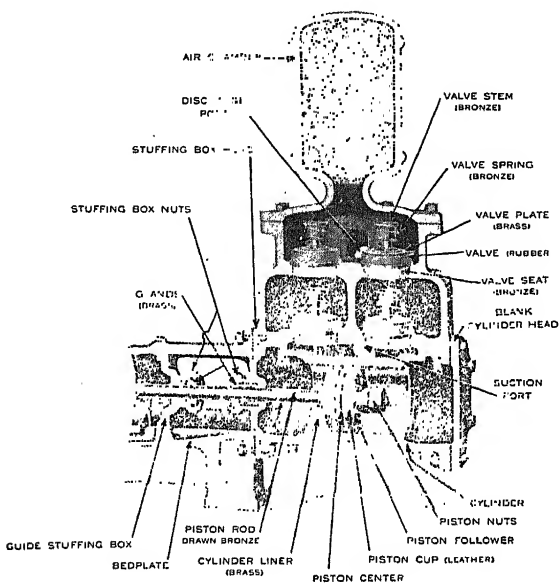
Section through water end of a pump showing valves, piston, packing glands, etc.
